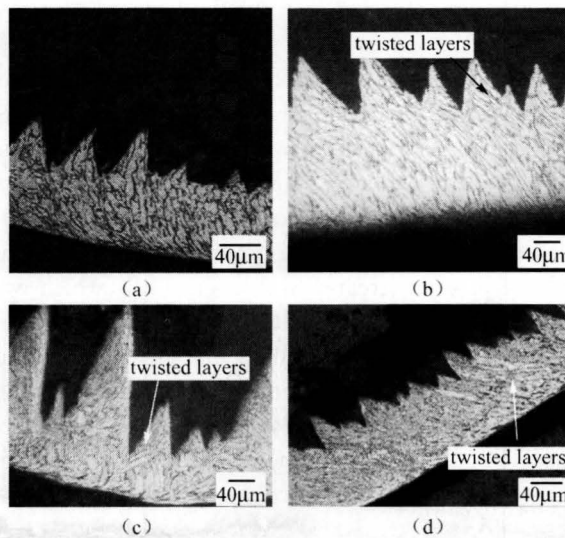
Aspects of chips by 1025 tool; MQF (a) initial cutting and (b) final cutting; abundant fluid (c) initial cutting and (d) final cutting
